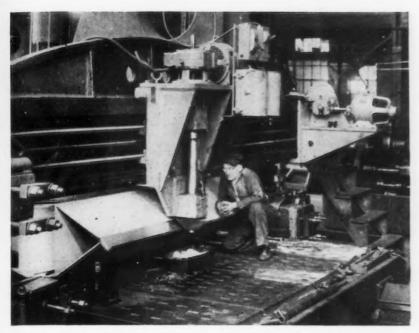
Milling attachment on the cross-rail of a 14-ft. planer for machining the flange joint of the "elastic hinge." These hinge members are 201/2 ft. wide.
